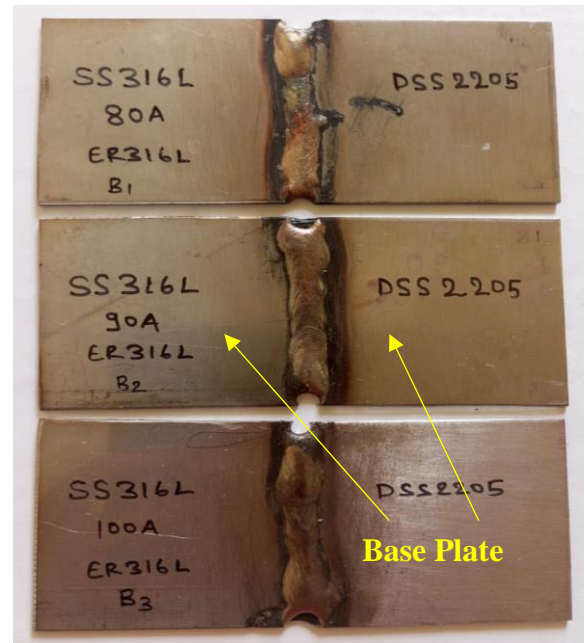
Sample after welding by using an electrode (b) E316L-16
